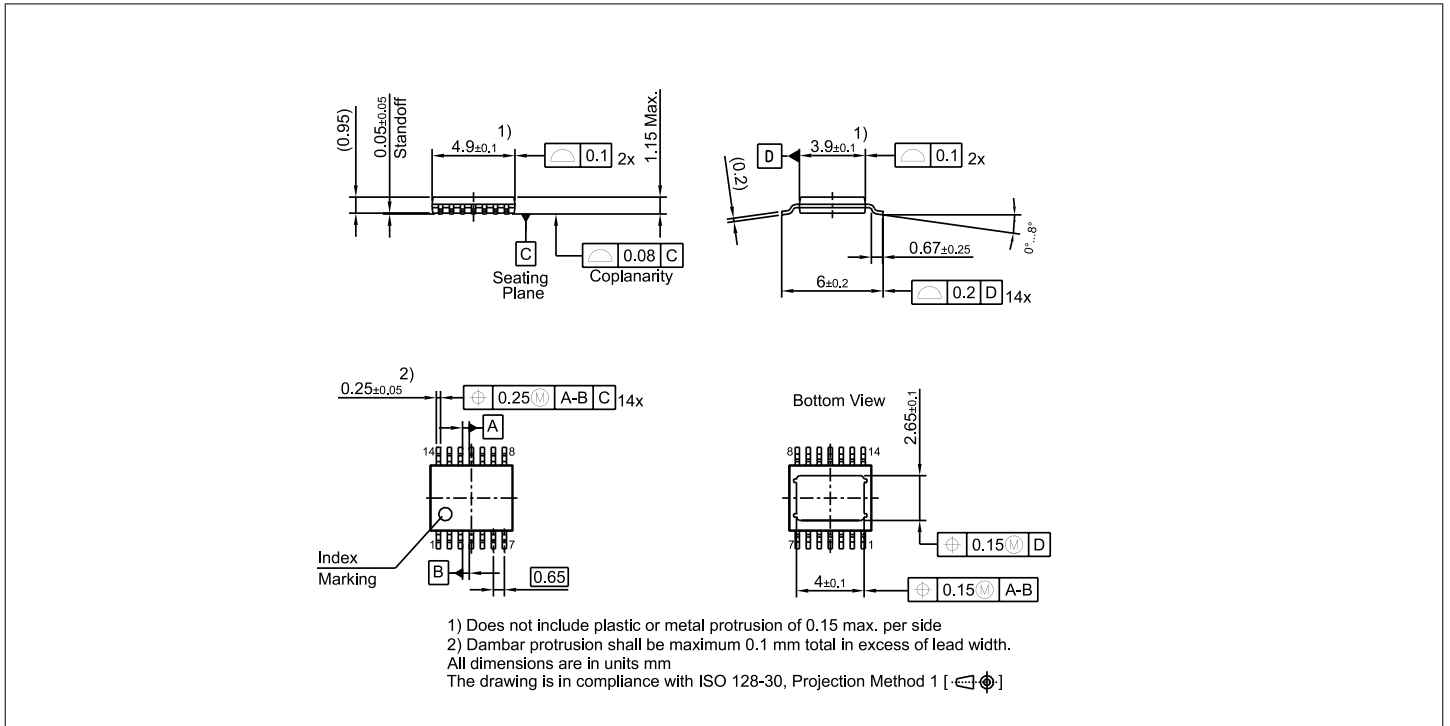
PG-TSDSO-14 dual small outline package dimensions
